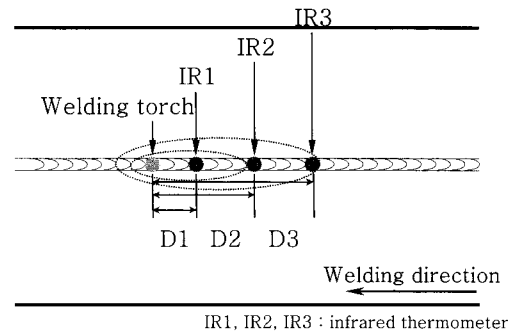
Schematic diagram for a distance between welding torch and infrared thermometers
